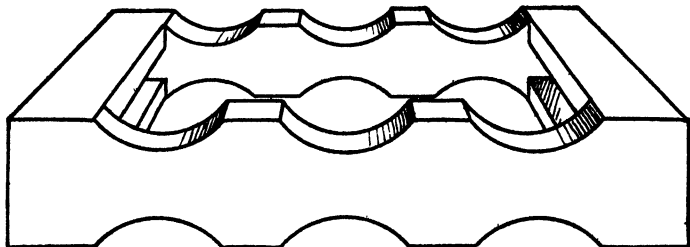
Special Pallet for Handling and Piling Cylindrical Stock
